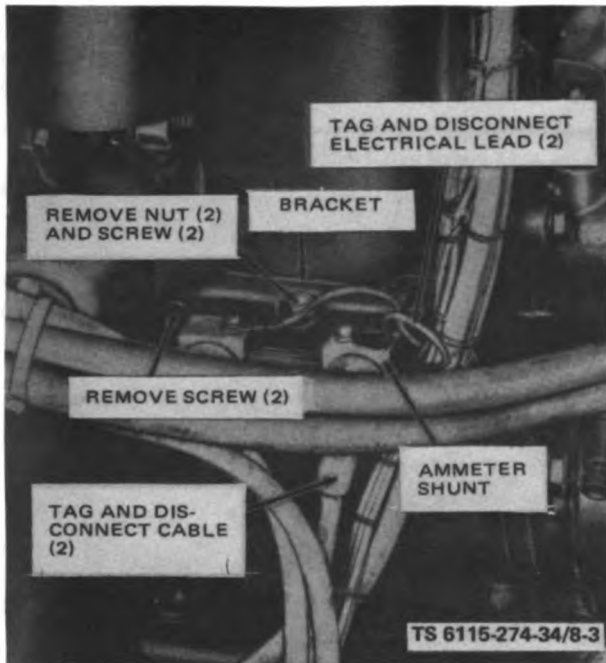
Ammeter Shunt and Bracket, Removal and Installation
